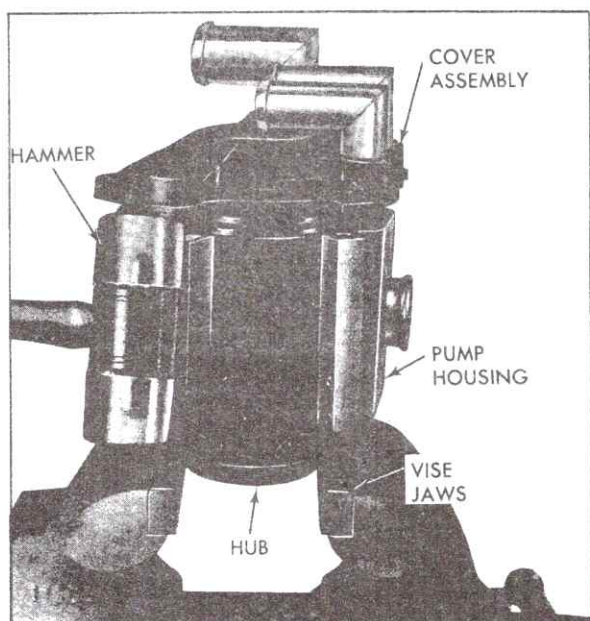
Removing Pump Assembly, Cover in Vise
